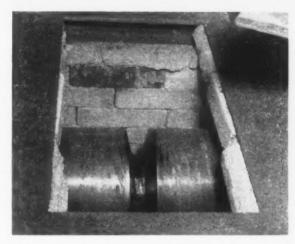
View of cylinder after placement in the oven. A few weld passes have been made, each pass being wire brushed and carefully examined with a magnifying glass for defects before the next pass.
